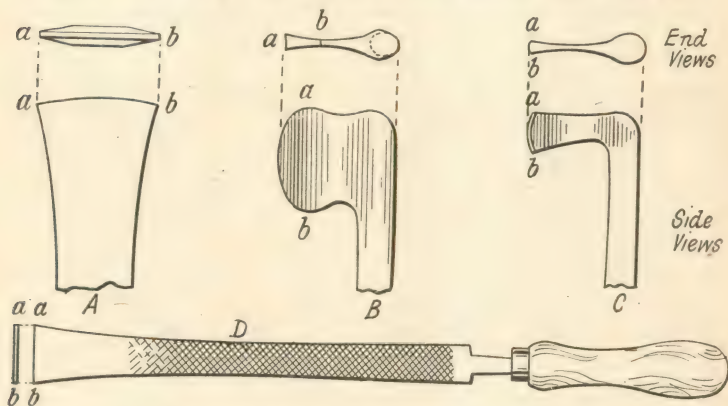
SOME USEFUL CARBON SCRAPING TOOLS
